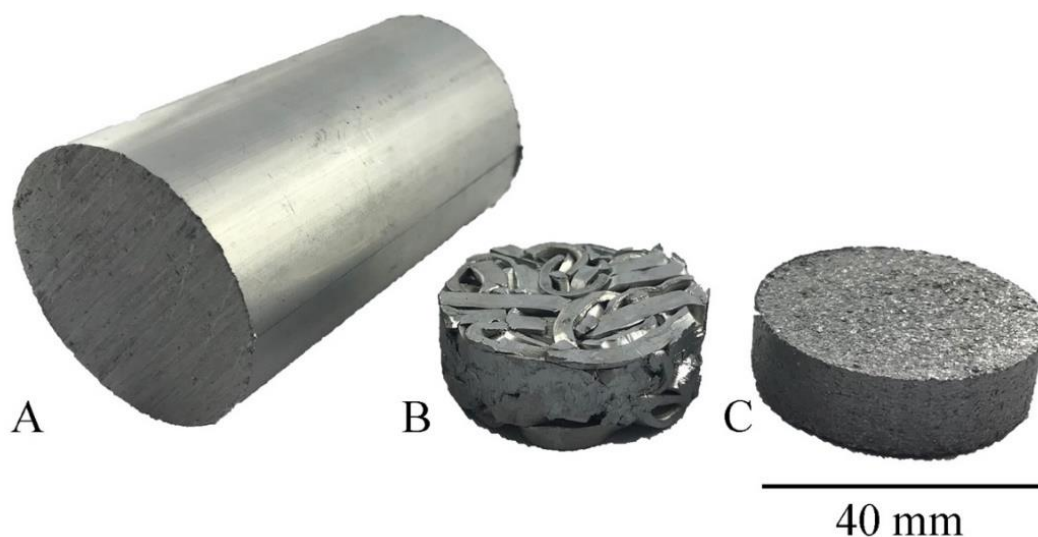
Test material: (A) after commercial extrusion, (B) after compacting the chip obtained from turning (C) after compacting the chip obtained from milling.
